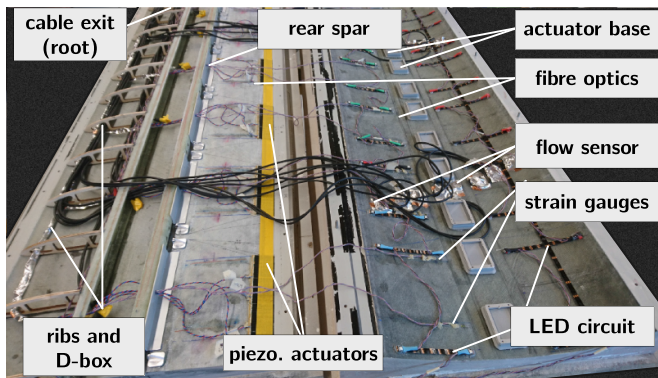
Assembly and integration of smart sensors, actuators and components in the wing.
